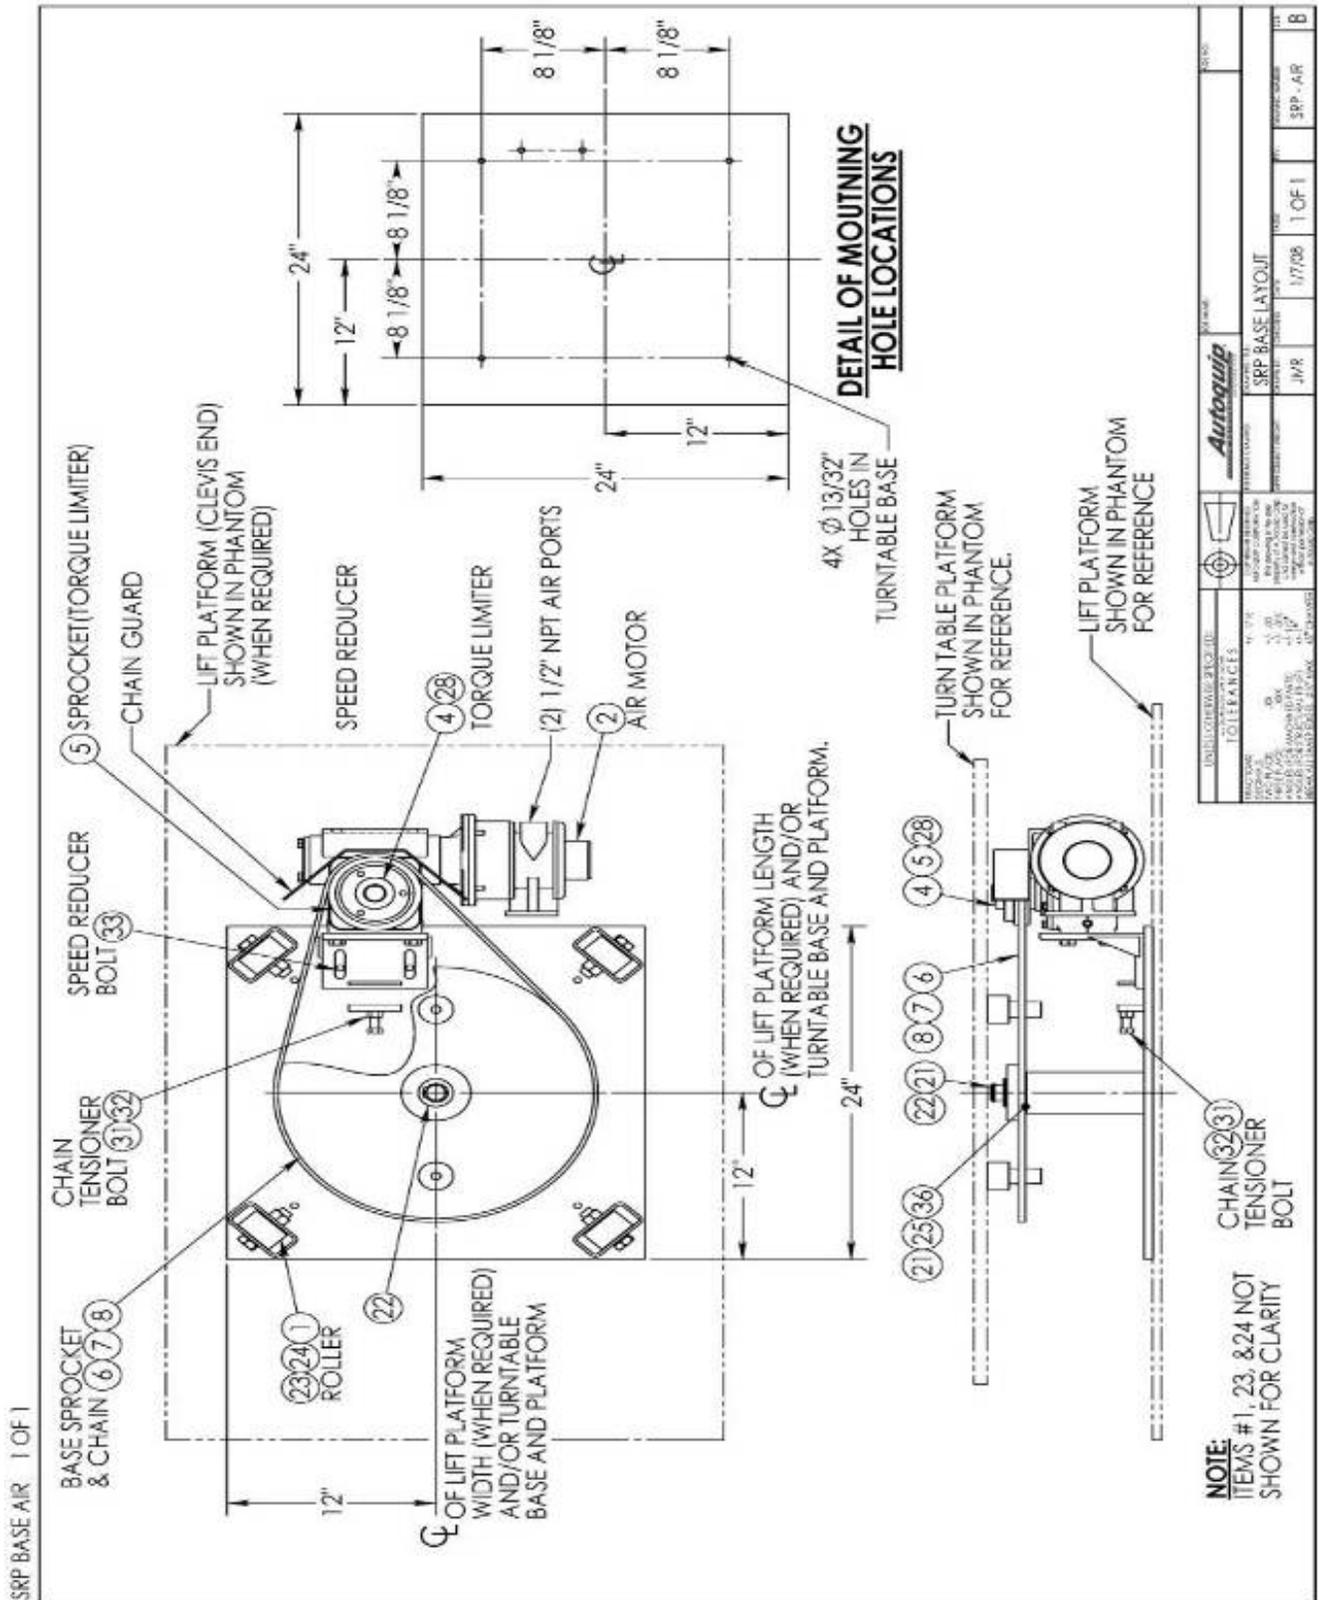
Pneumatic Motor 'SRPA' Base Layout
